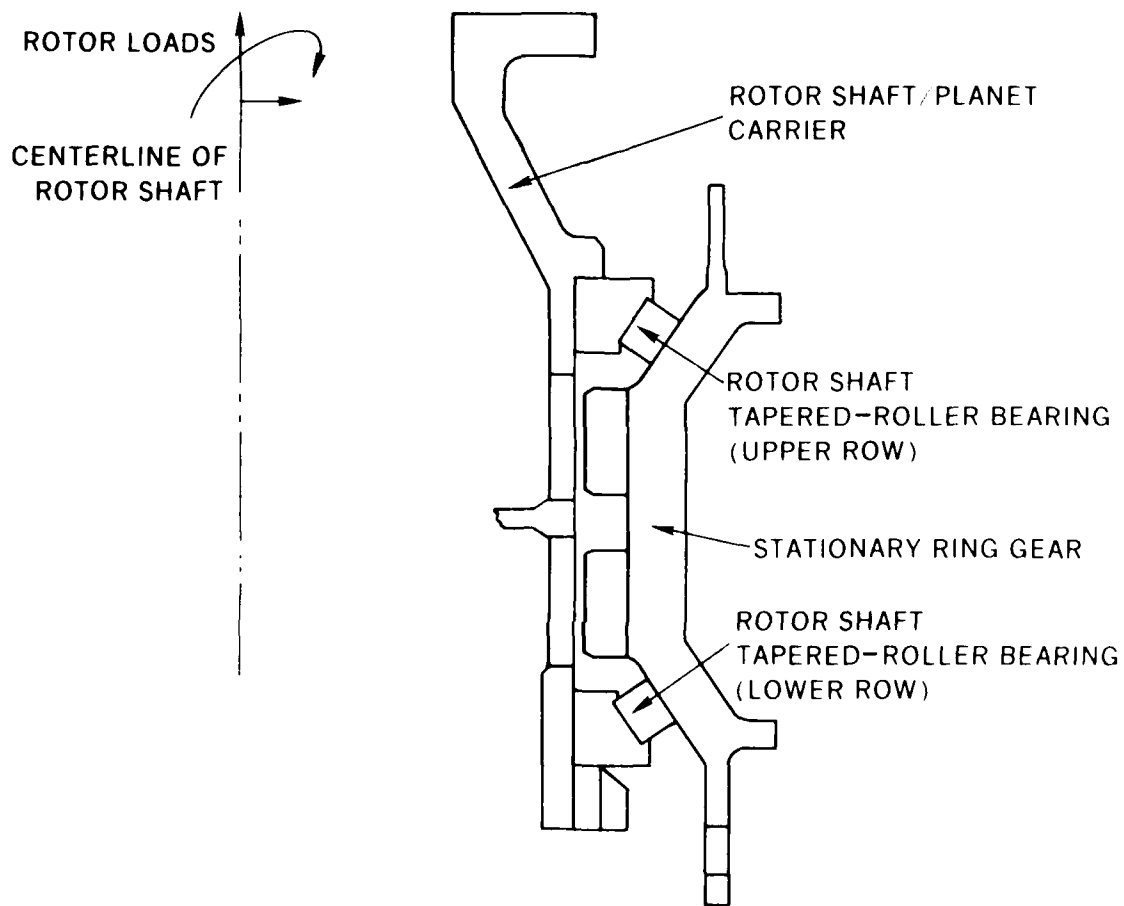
Cross-Sectional View of Rotor Shaft Bearing and Bearing Support Structure.
